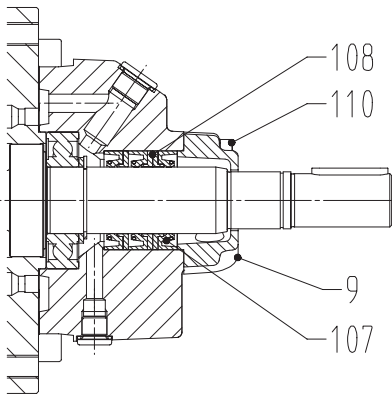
SN..ER..U4, internal bearing, three shaft seal rings
